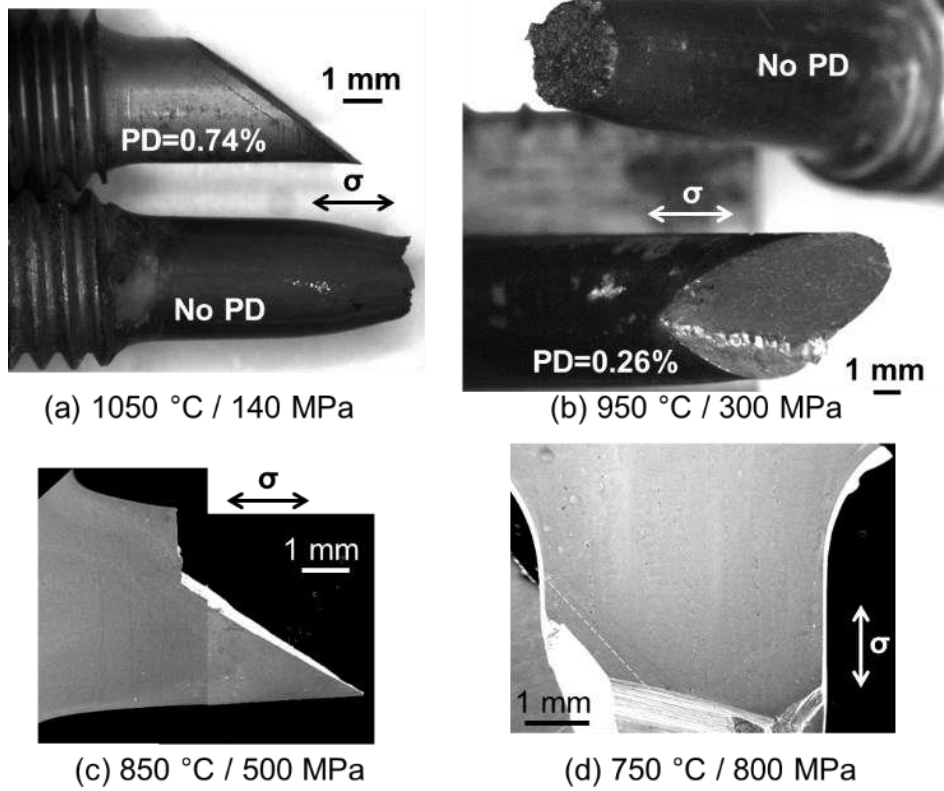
Observed images of specimens' fracture surfaces after the creep rupture tests.
